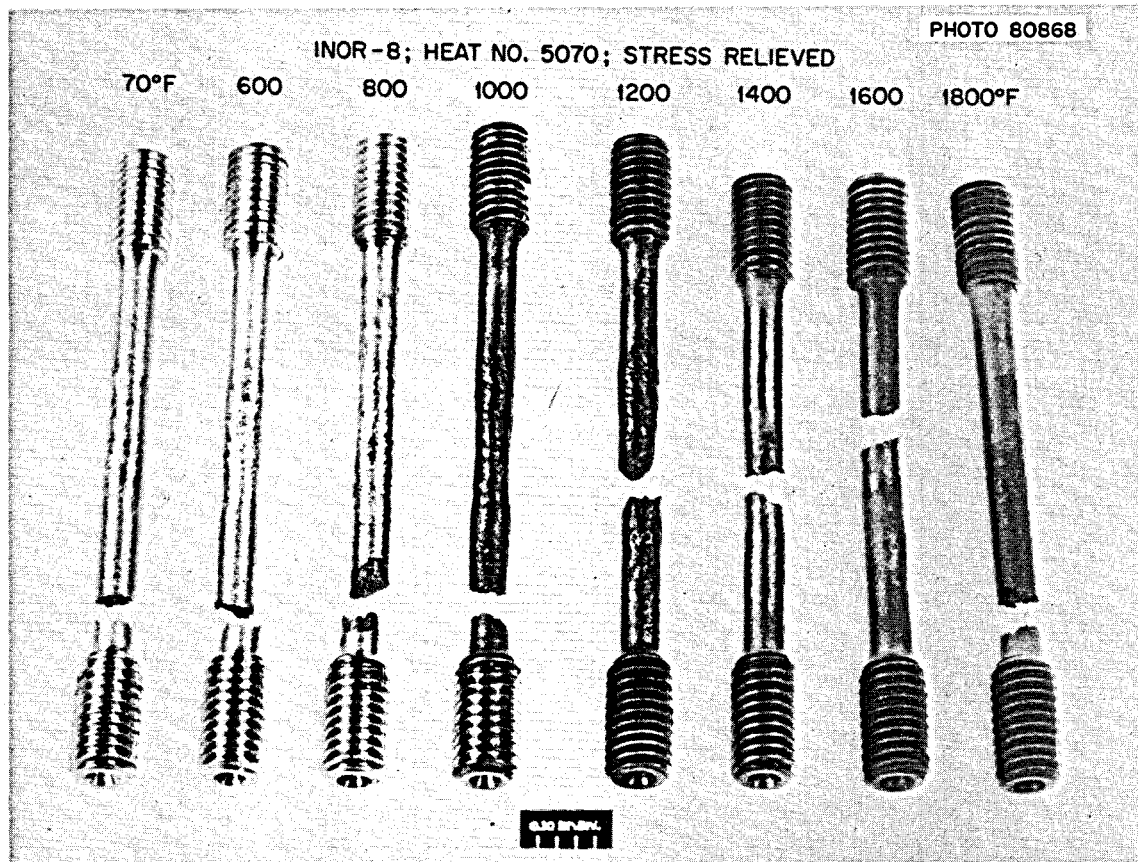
Tensile tests in INOR-8 heat 5070 (stress relieved 2 hr at 1600°F in hydrogen) showing location of fracture.
